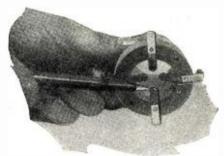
The pencil points to a bent contact spring on the vacuum tube socket.
